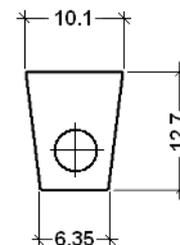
Cross-section and dimensions (in mm) of a bar.
